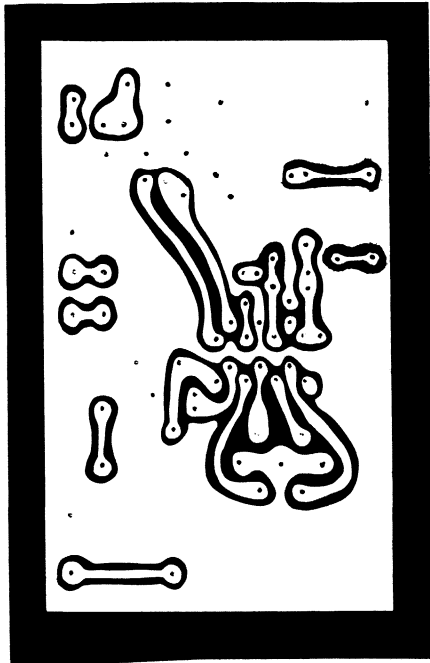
Recommended layout of printed-circuit board for TV-receiver sound strip utilizing RCA-CA3042. (Actual Size, Bottom View)
